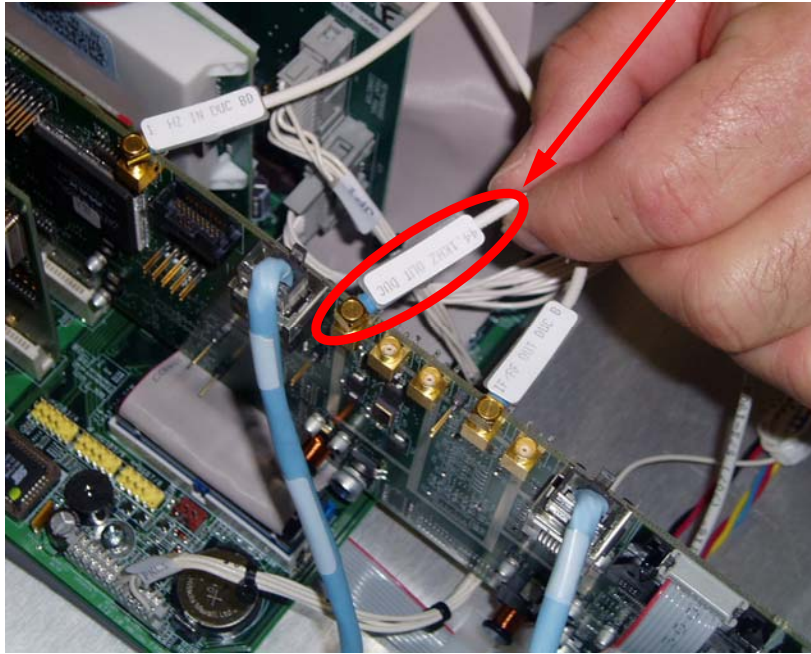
Disconnect 44.1 kHz Cable from DUC PCB Assembly
